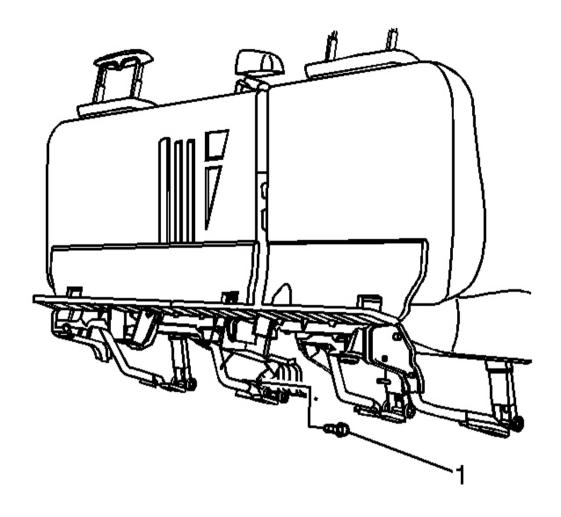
Seat Belt Anchor Bolt Courtesy of GENERAL MOTORS CORP.
